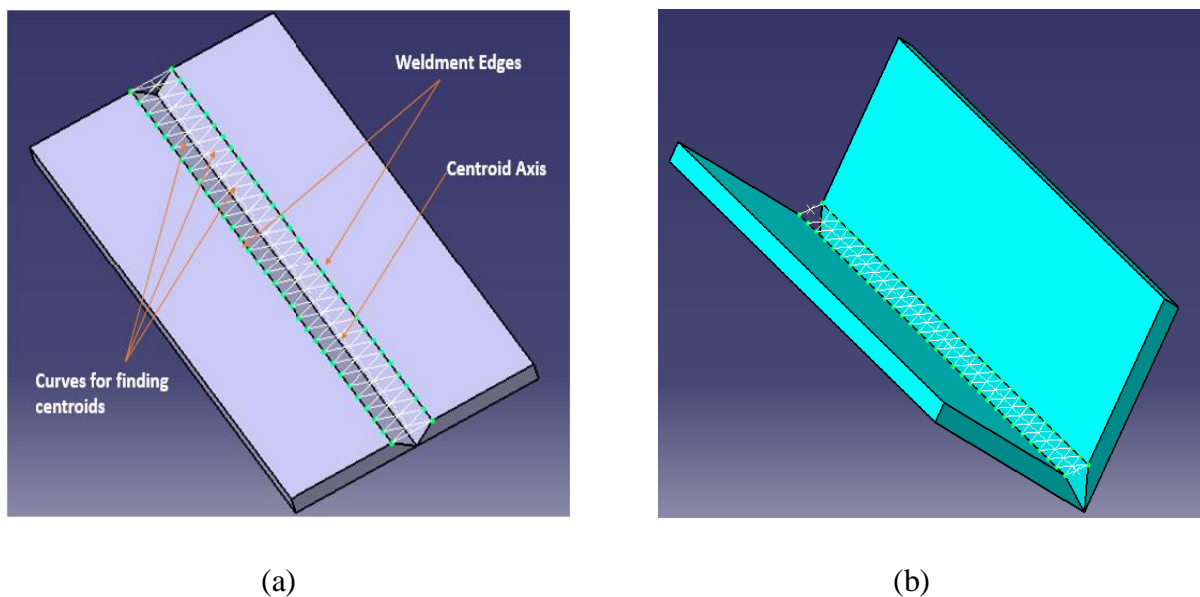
Sewing diagram in CATIA for butt and l shape weld joint
